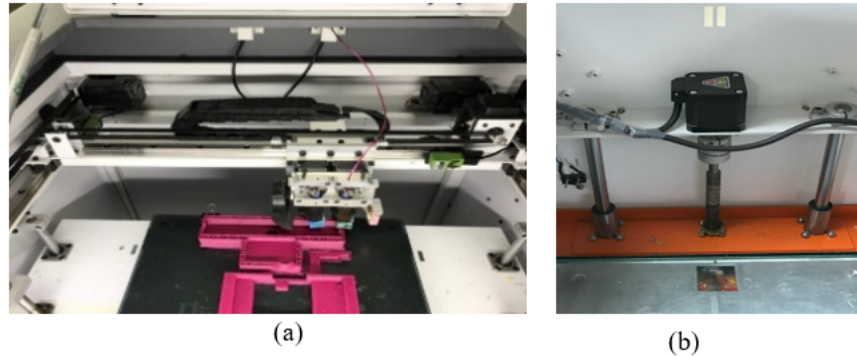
(a) X-axis Mechanism and Y-axis Mechanism (b) Z-axis Mechanism
